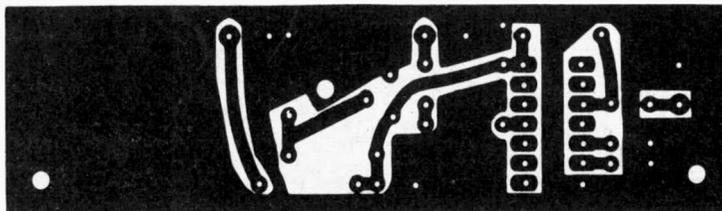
Full size printed circuit master of the VHF Prescaler board
